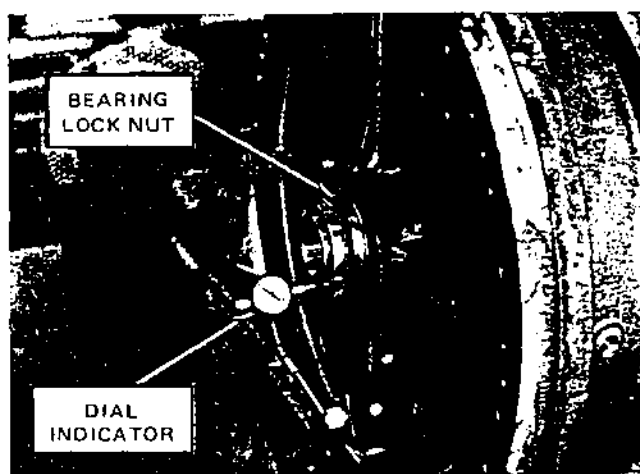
MOTOR ASSEMBLY END CLEARANCE
